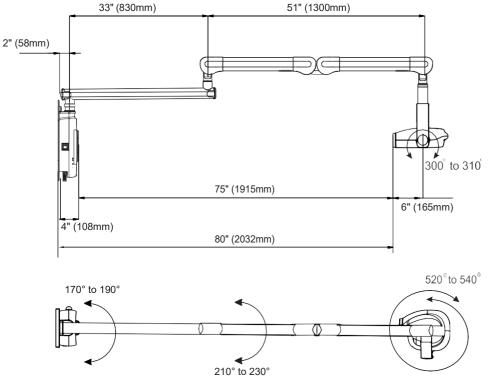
Wall Mounted ImageScan HD 33" Support Tube Fully Extended Right Side and Top Views
